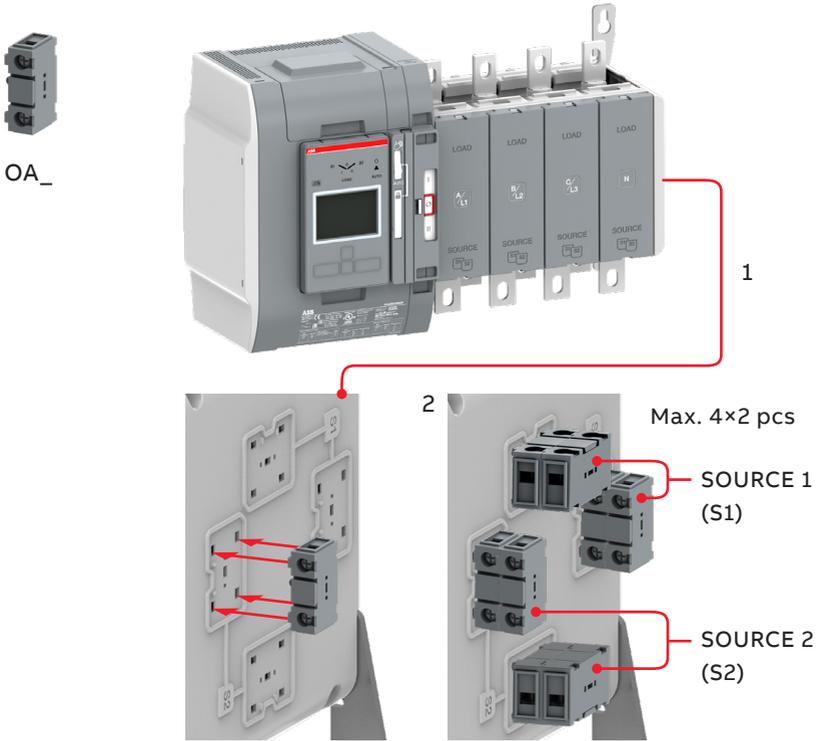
Mounting of the auxiliary contact blocks, type OA
